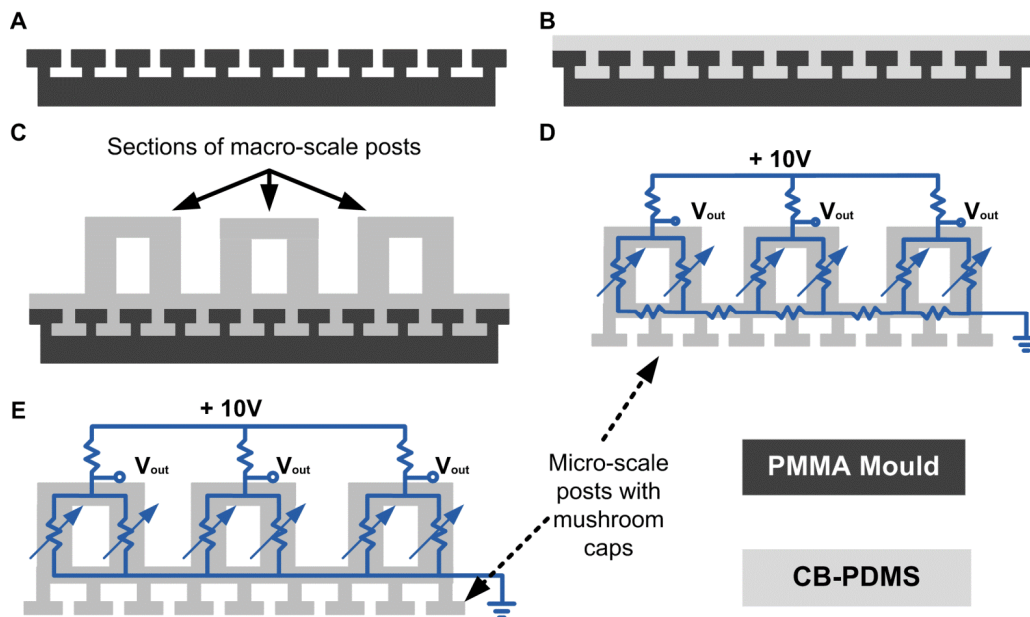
A. PMMA mould manufactured using a laser cutter to form an array of 1 mm x1 mm by 2 mm tall macro-scale posts. B. CB-PDMS mixed, spread over the mould and degassed in a vacuum chamber. C. Cured array of macro-scale posts. D. Strips of macro-scale posts manufactured from CB-PDMS.
